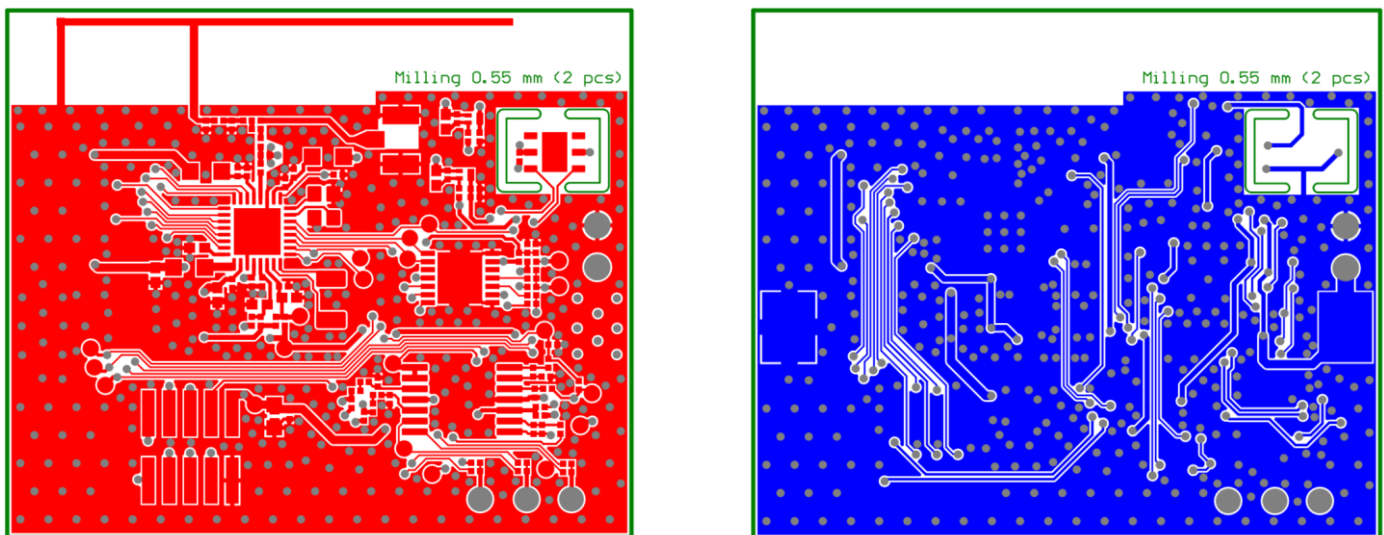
EFR32xG27 2-layer reference layout design: top and bottom layers
